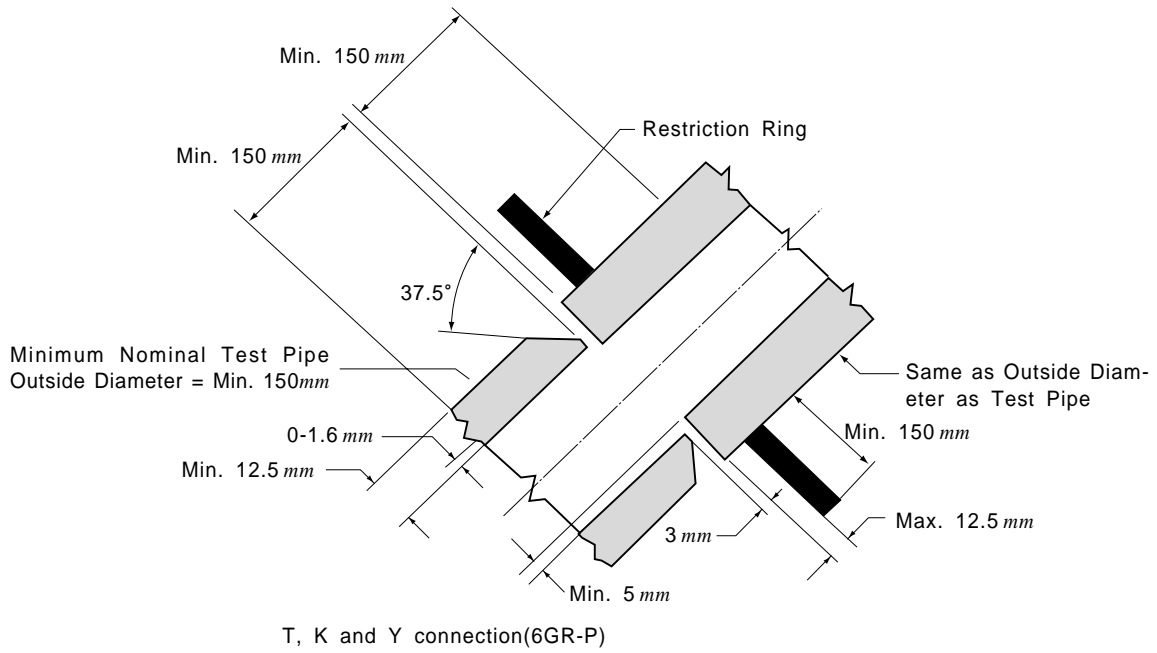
Dimensions and types of assemblies for pipes or Grade 3R
